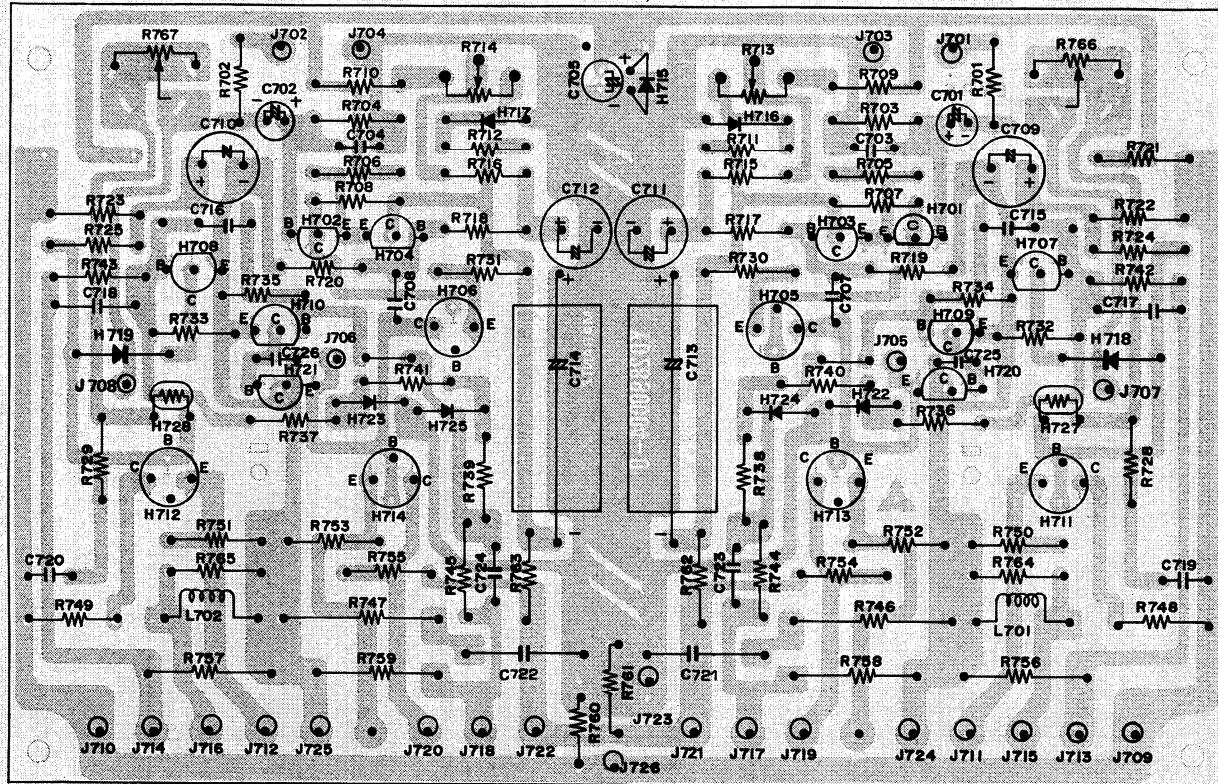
Main Power Amplifier Assembly P700 Component Locations
